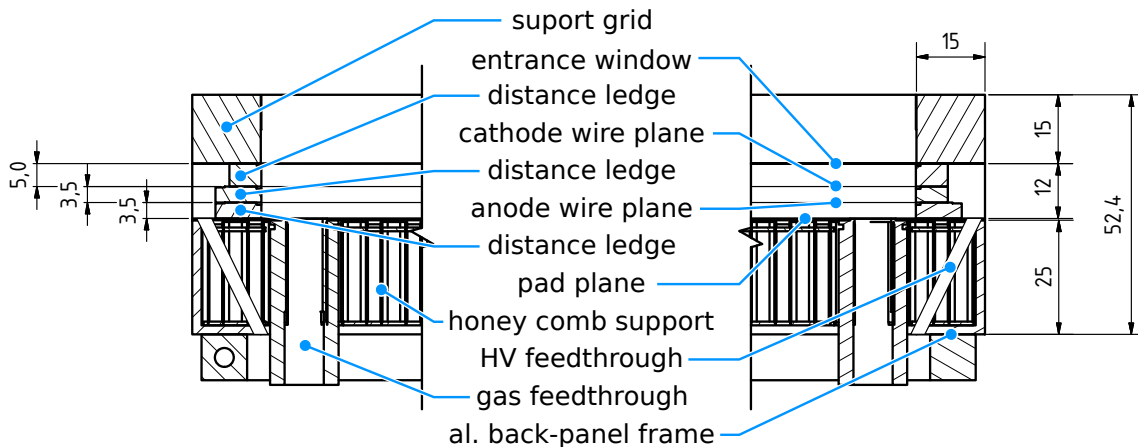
Cross section of the outer parts of a CBM-TRD ROC. All dimensions are in millimeter.
